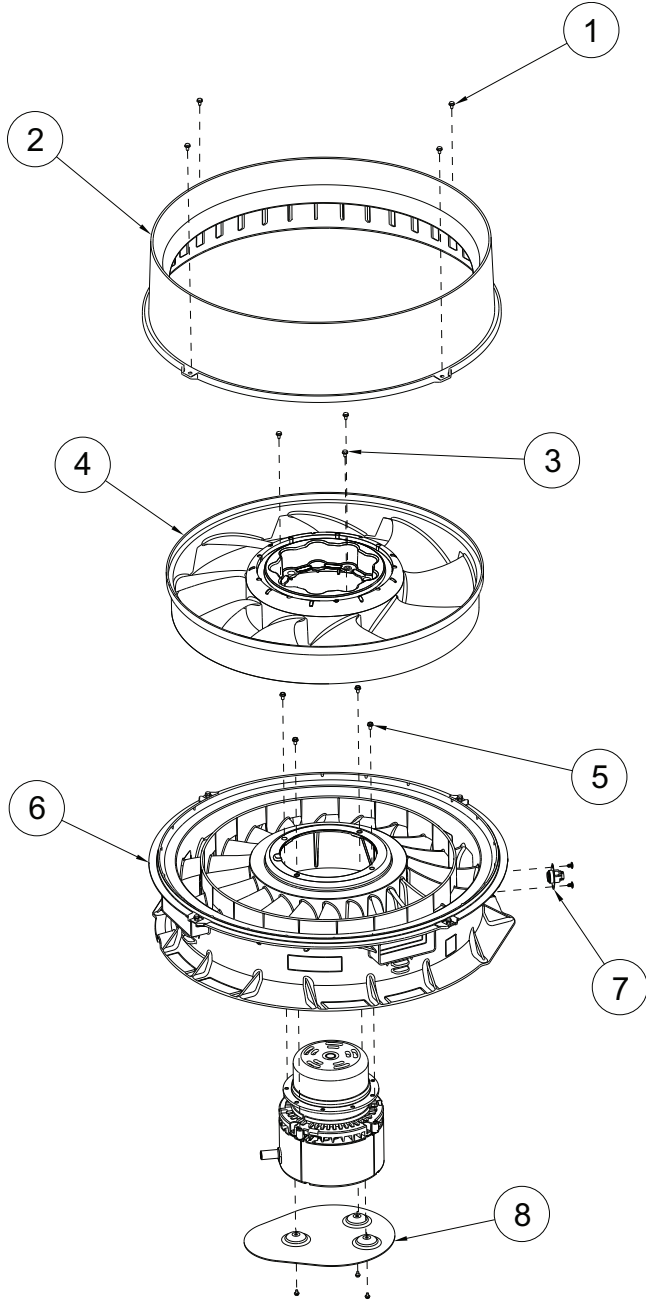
Disassembling Standard or Medium Static Motor and Fan Assembly
